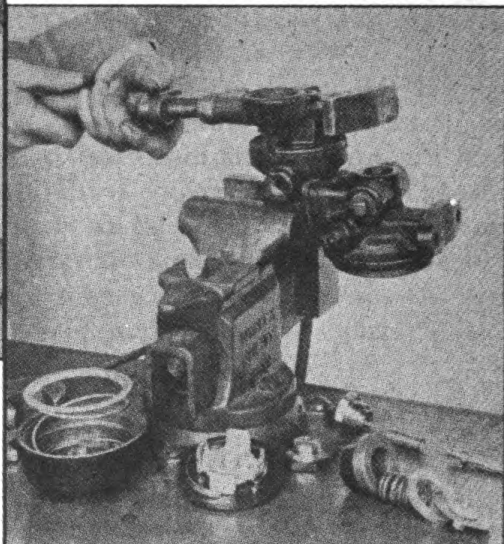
RELAY—EMERGENCY VALVE—REMOVING VALVE STEM AND DIAPHRAGM
